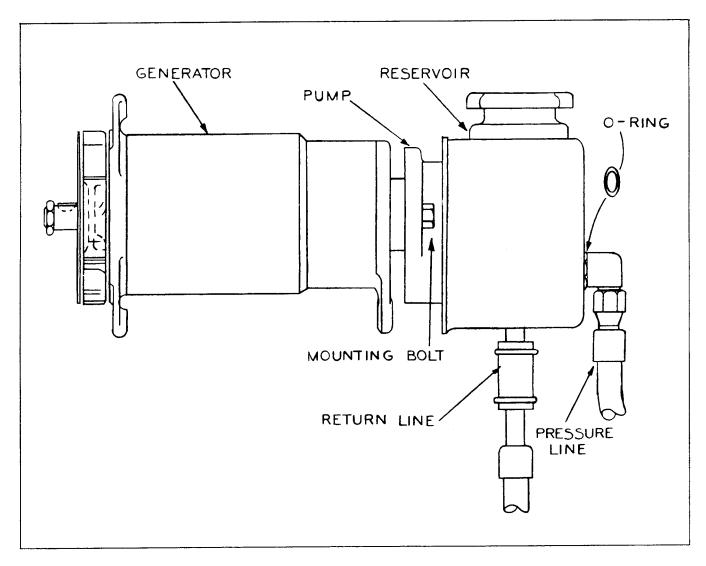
Typical Power Steering Pump (Machines So Equipped)
